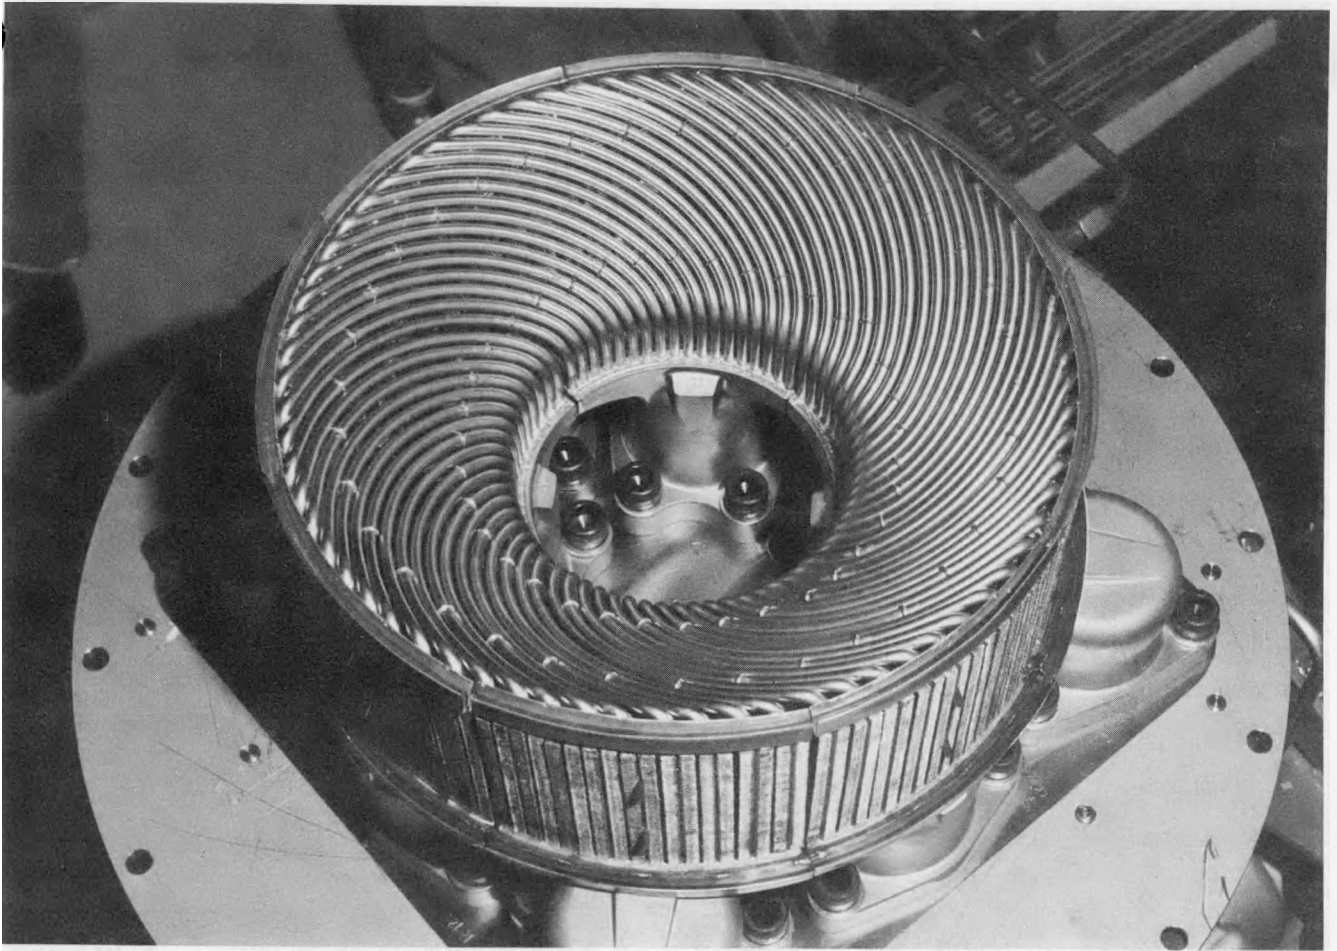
Envolute Heater Head for United Stirling P-40 Engine
